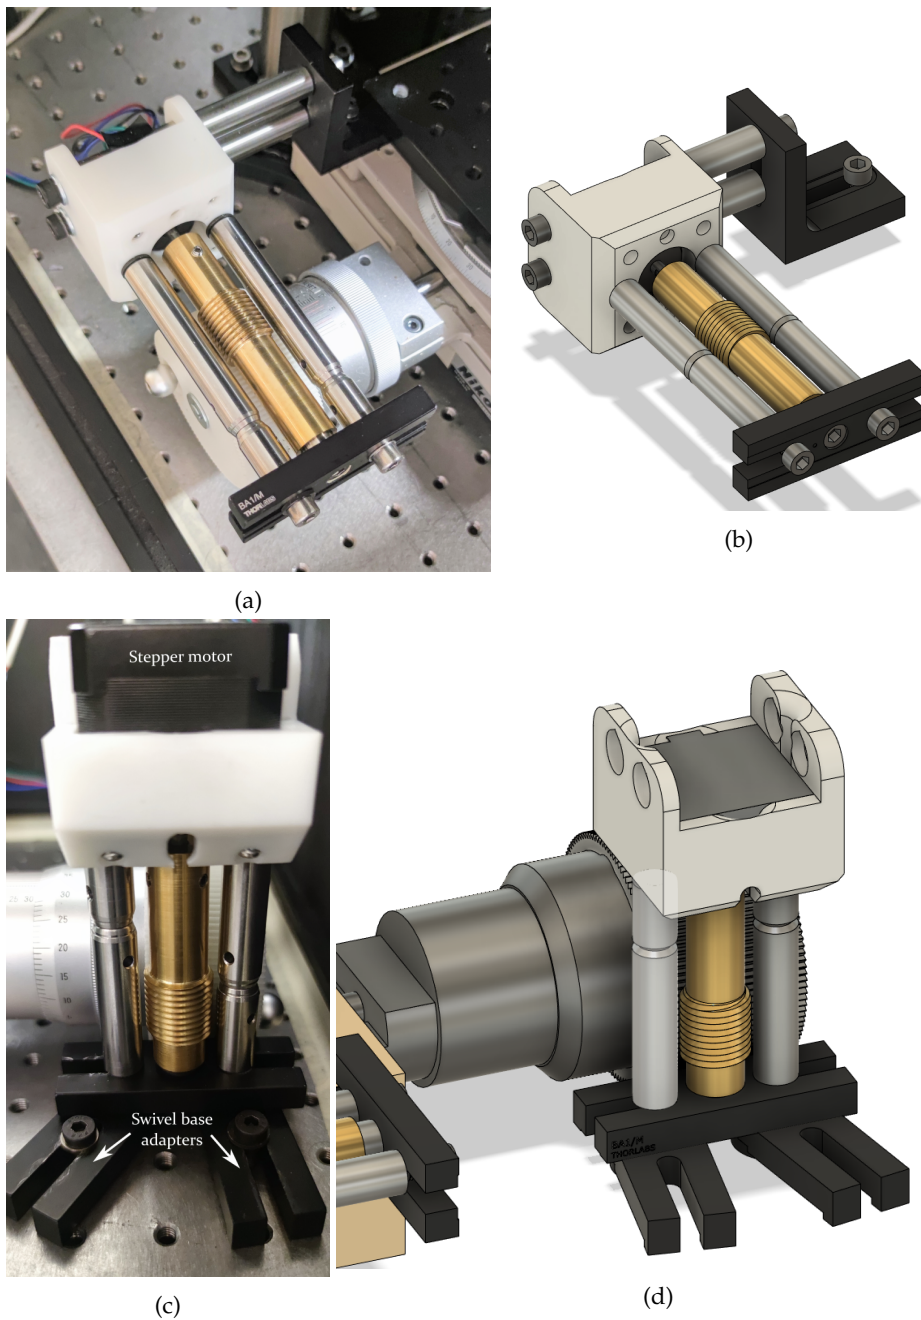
Photos and CAD drawings of the stepper motor assemblies for the stage Y and X control (a)/(b) and (c)/(d) respectively.
